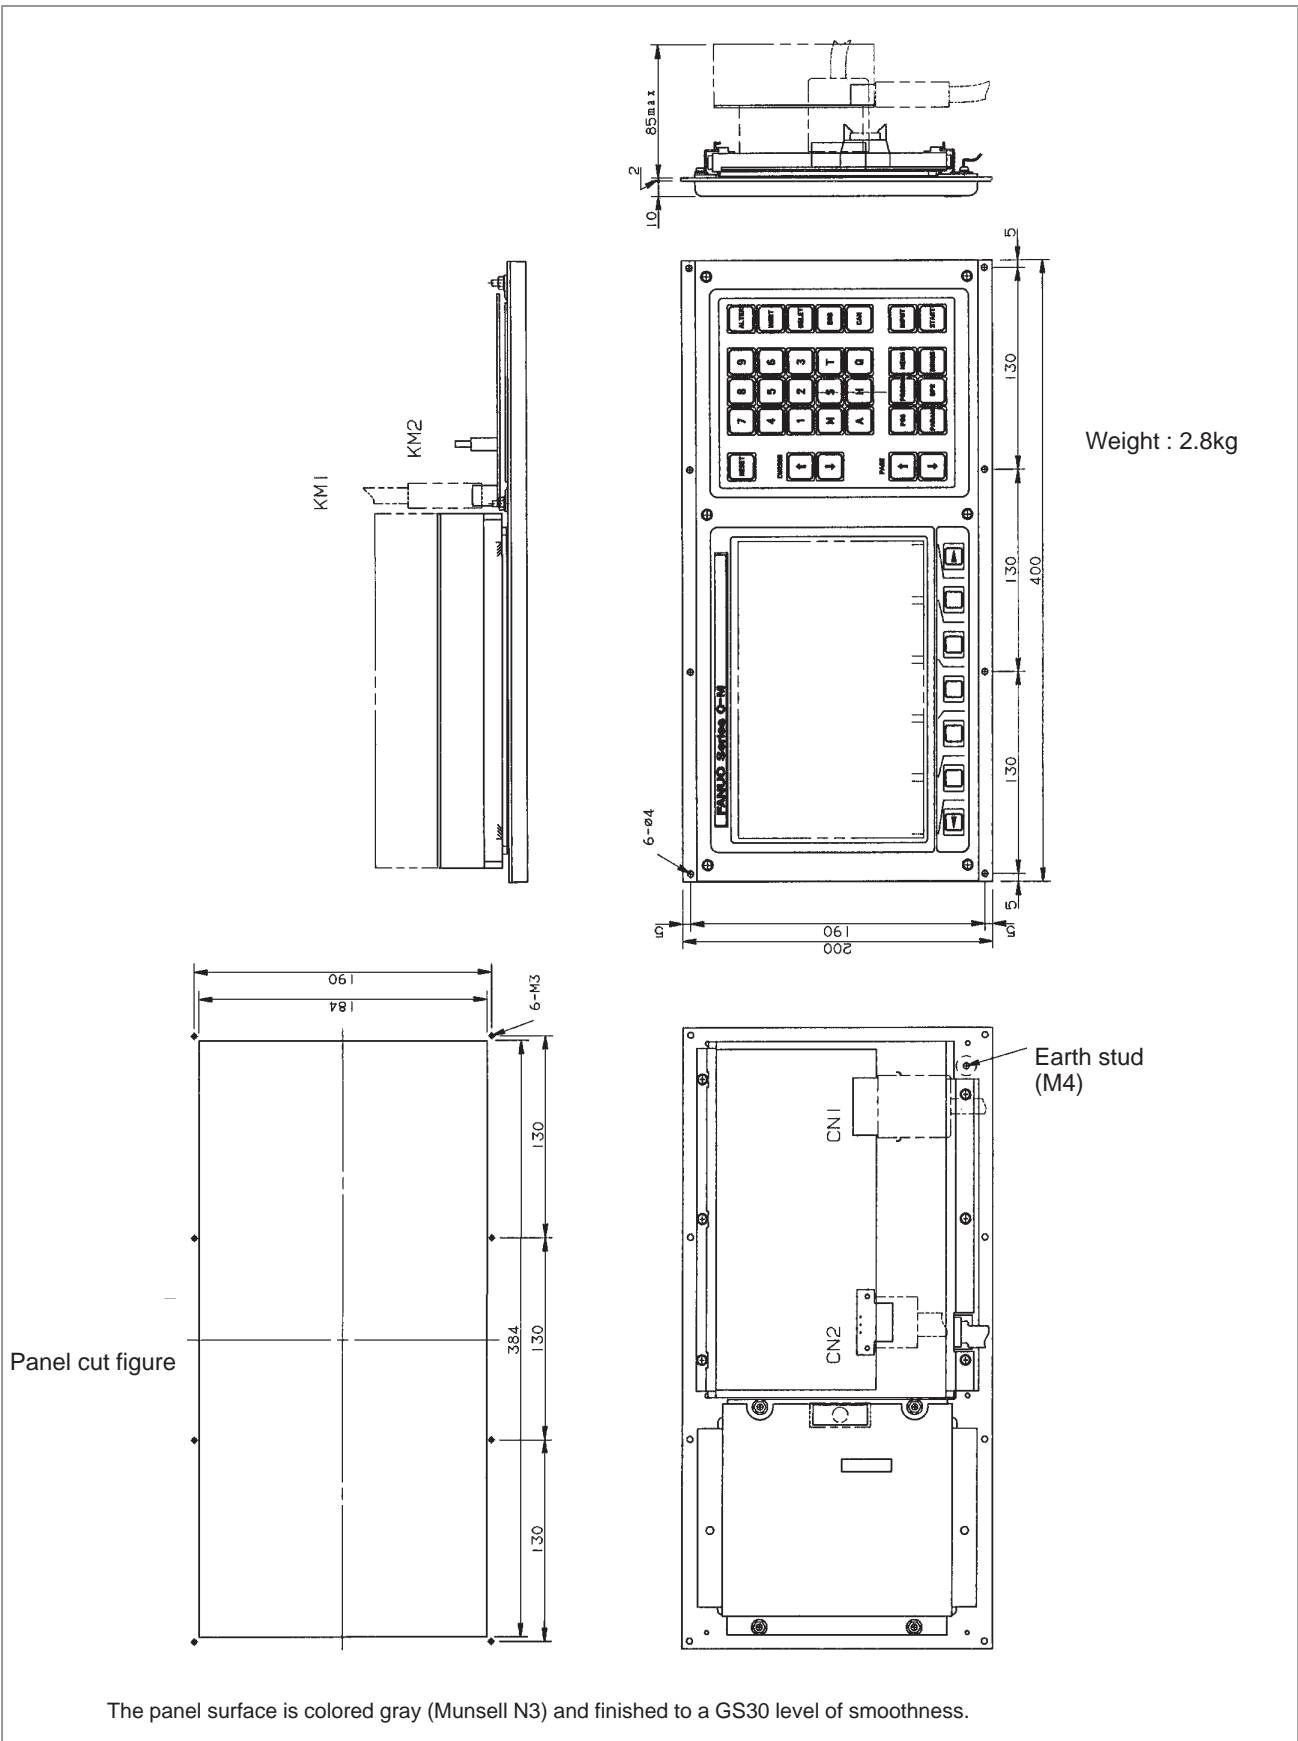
(g) Installing drawing for 14" CRT/MDI
